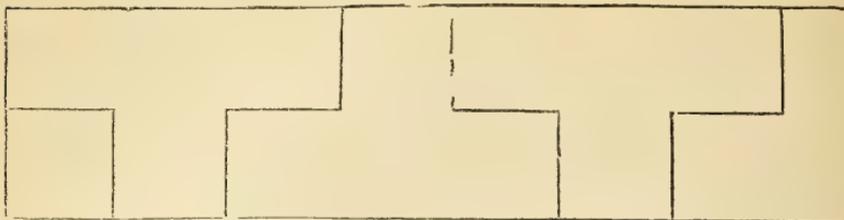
A Piece of Zinc or Sheet Lead marked for cutting into Labels.
